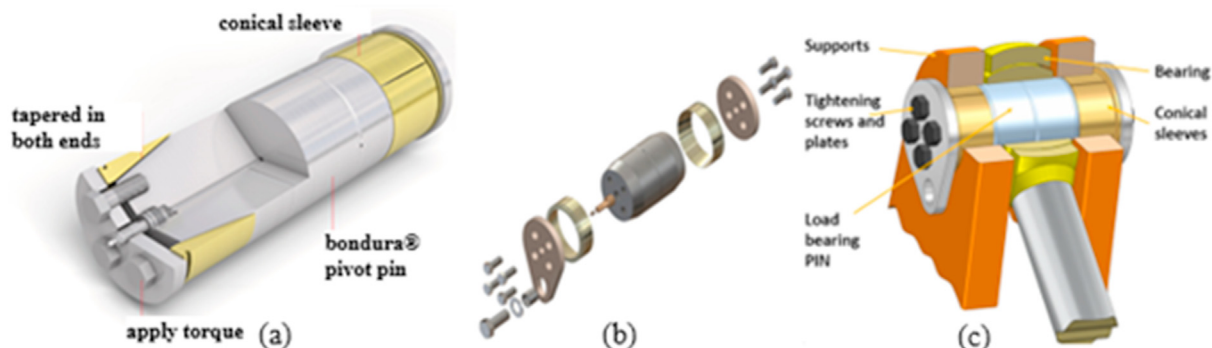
Expanding pins - (a) pin assembly, (b) exploded view, (c) pin installed in joint.
